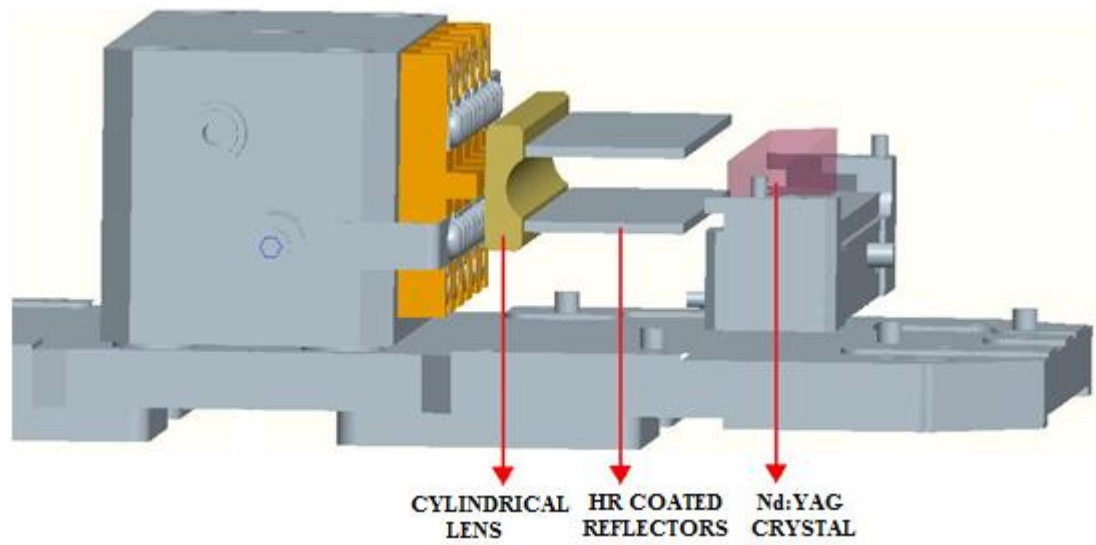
CAD Drawing of the Designed Pumping Chamber
